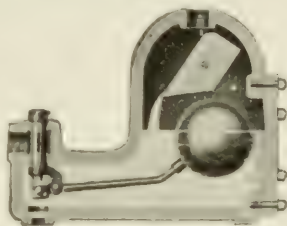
NASON-VESUVIUS STEAM TRAP, SHOWING BUCKET DUMPING VALVE DISCHARGING
